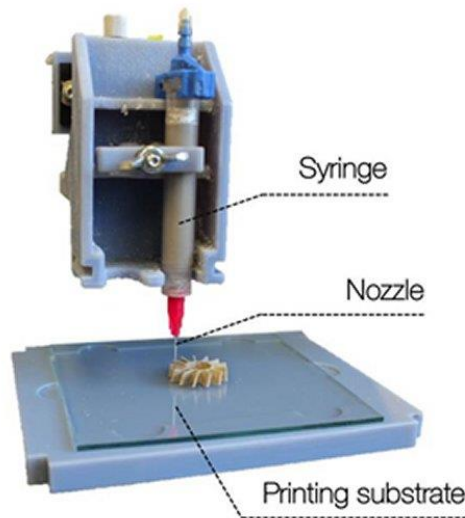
Syringe Extrusion 3D-Printing technique diagram [25].
